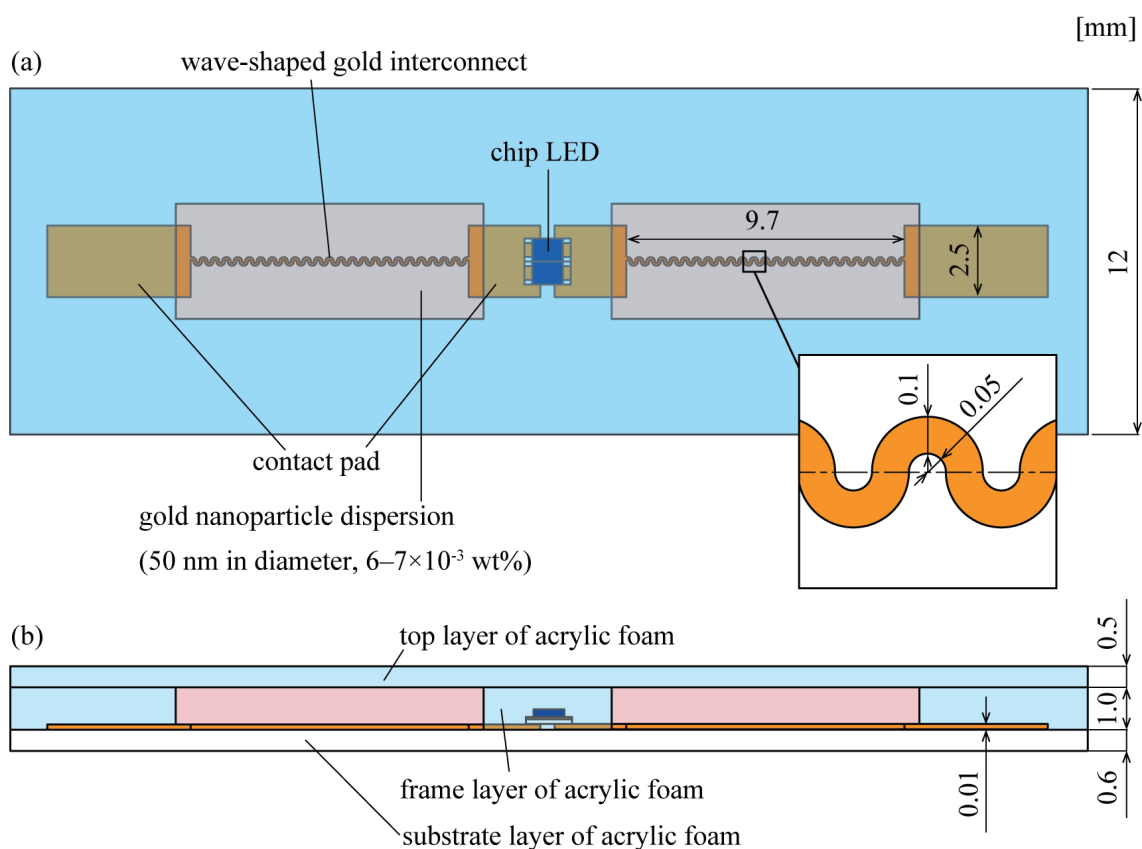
Dimensions of flexible device, which is composed of self-healing gold interconnects and surface-mounted LED chips. (a) Top view and (b) Cross-sectional view of flexible device.
